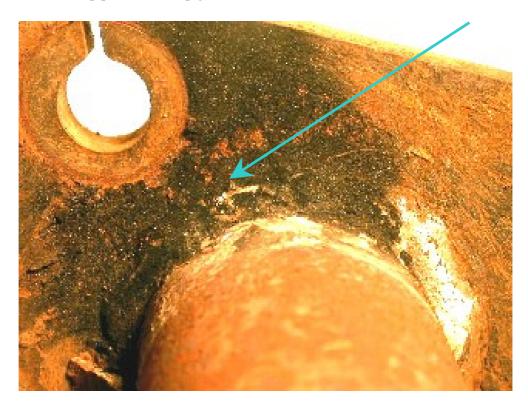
Detail of extractor engine flange and associated pipe showing carbon deposits, cracking (arrow) and remnant putty.
